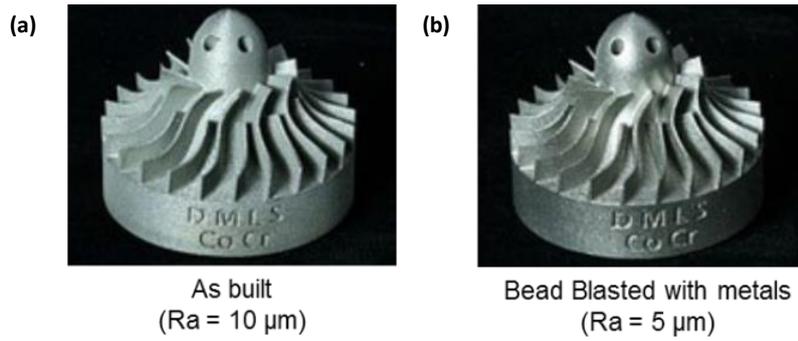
Example of surface finish (a) as built and (b) after blasting, which smoothed the surface throughout.
